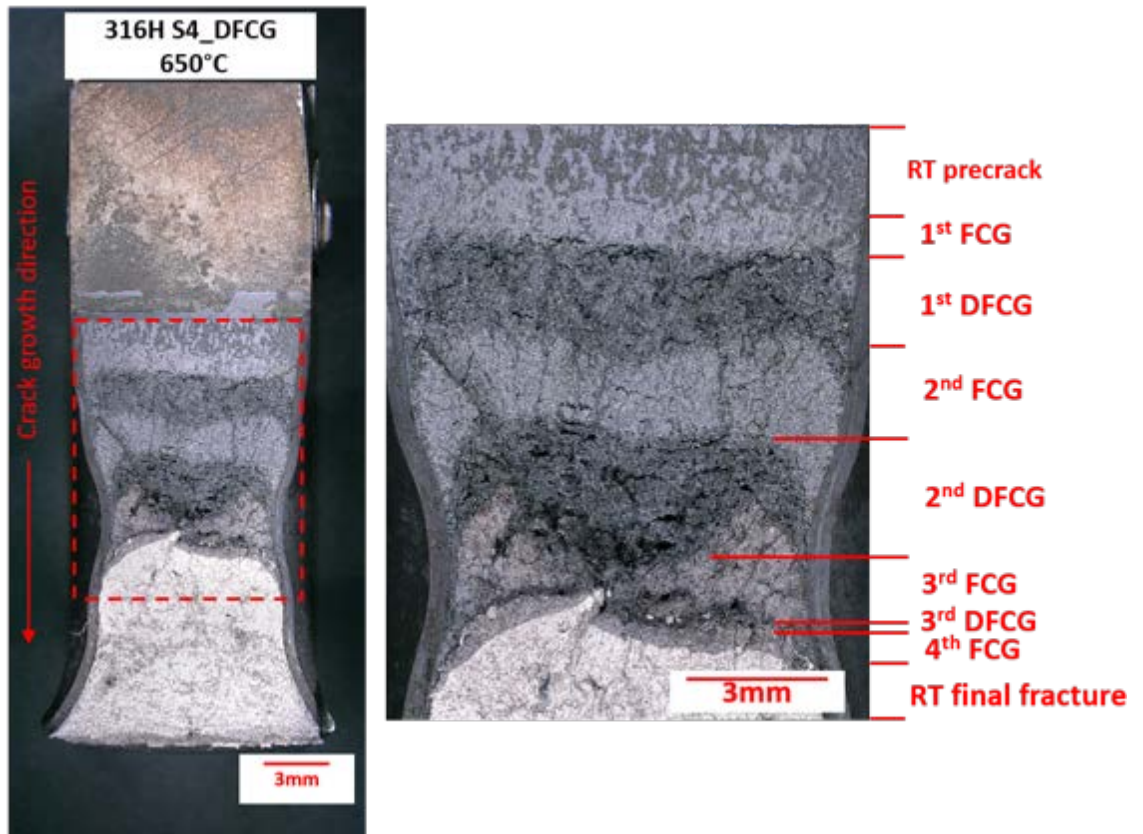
Optical fractographs of 316H CT testpiece under 1-3600-1-1 dwell-fatigue loading in air at 650°C.
